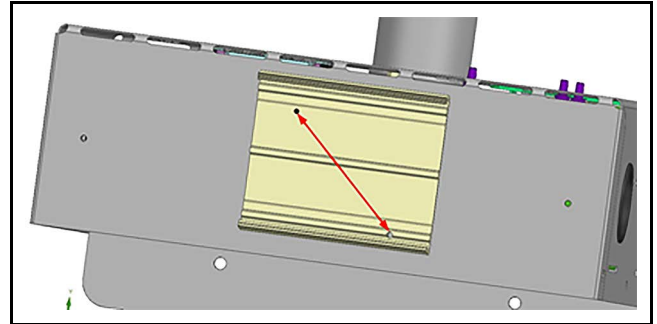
Location of Drilled Holes on the Mounting Base (LM Control Box Top View)
